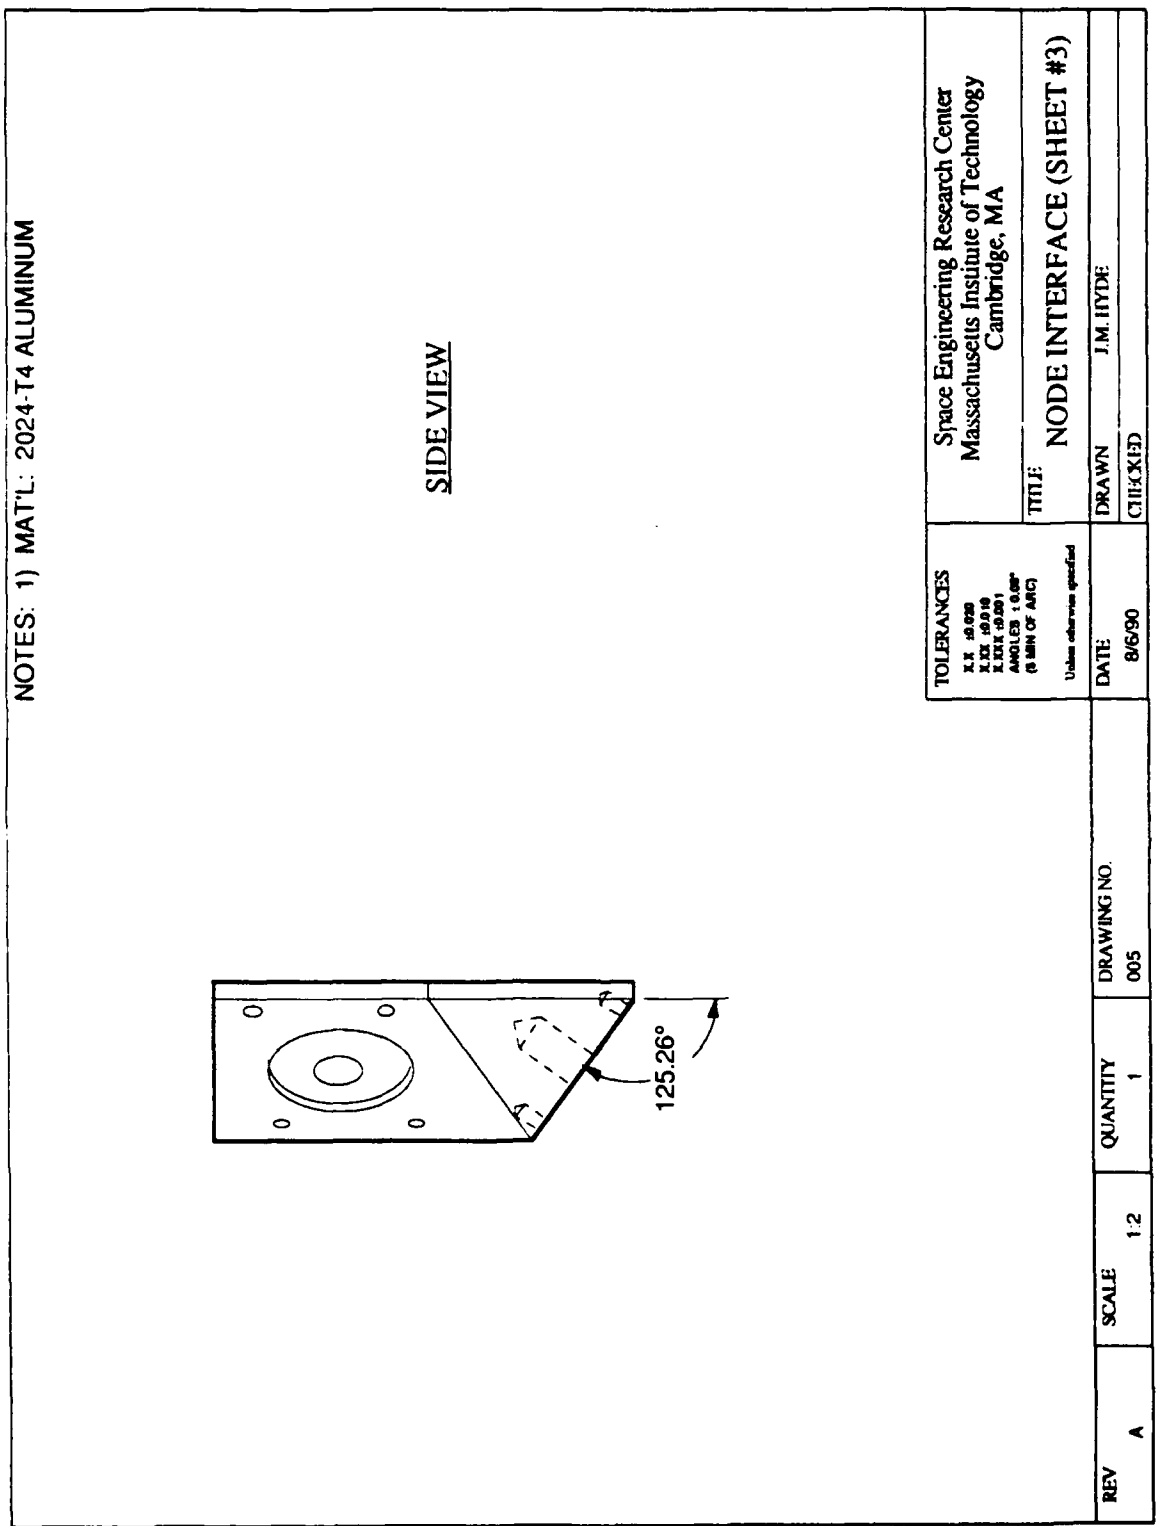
Node/motor interface engineering drawing, sheet #3.
